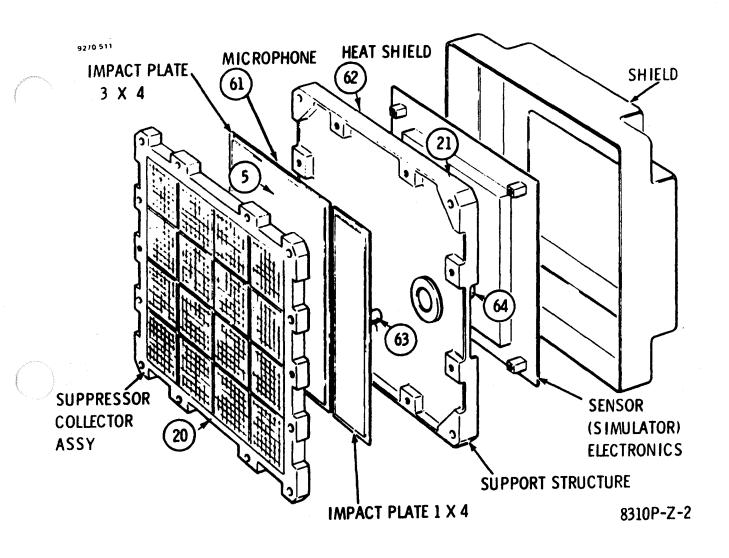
Exploded View of Single Sensor (T/C Locations West Sensor)
